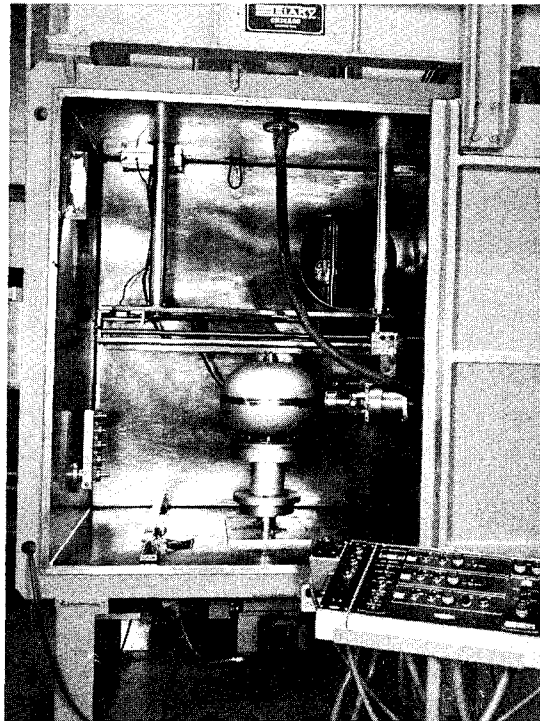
Assembly of Two Half Sections in Welding Chamber with Electron Gun in Position for Welding
